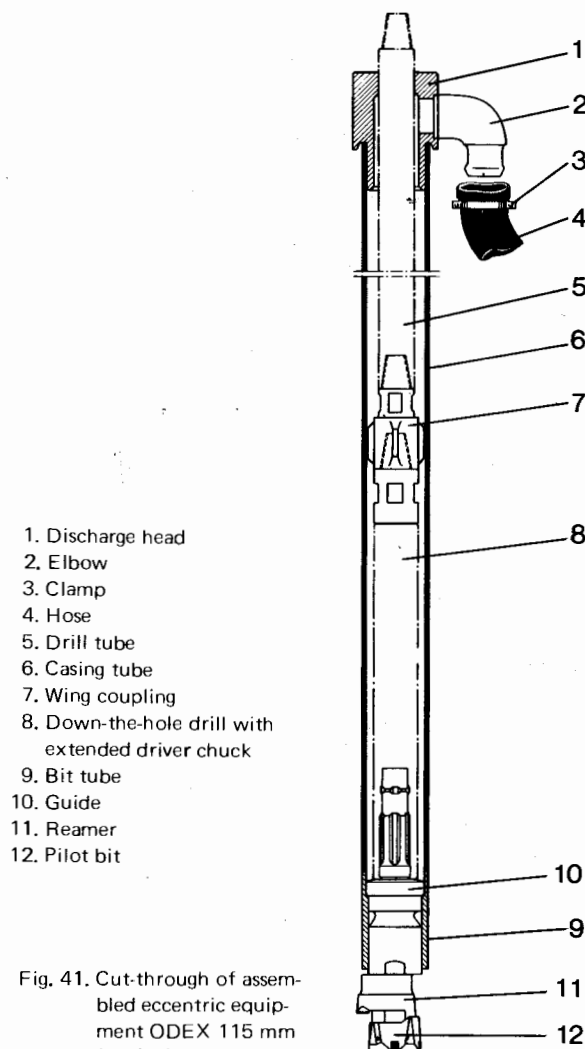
Cut-through of assembled eccentric equipment ODEX 115 mm (4 1/2")
